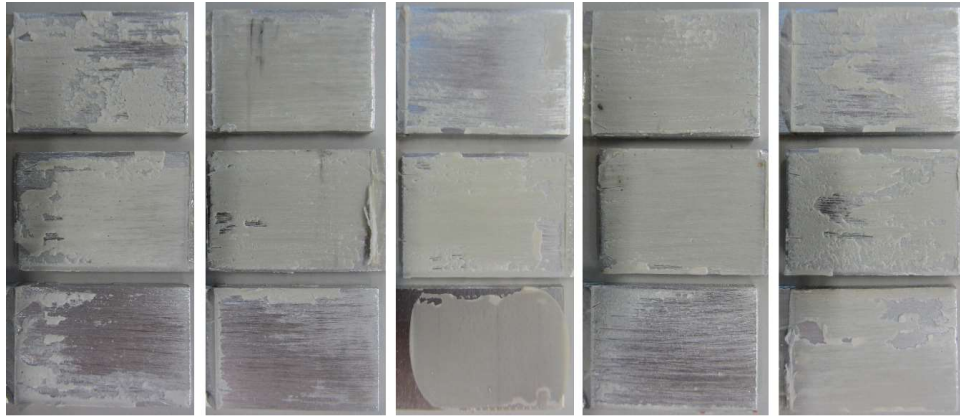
Failure modes of DLJ specimens bonded with the adhesive Sikaforce®7752 $L_0=37,5$ mm.
